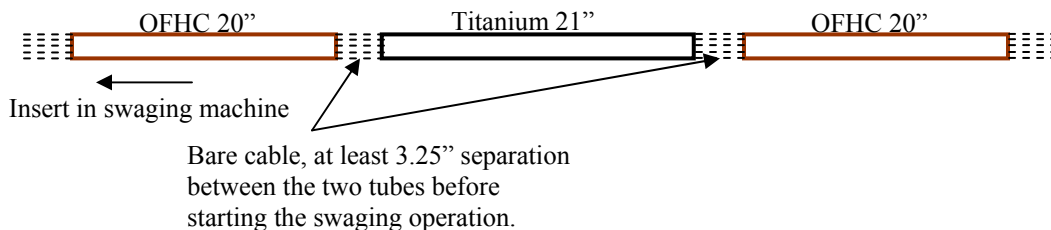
Schematic of the cable before being swaged inside copper and titanium tubes.
